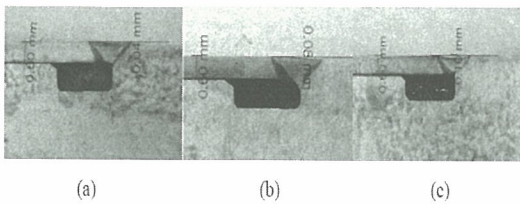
Macro-cross sections of laser welded specimens using type (a), (b), and ©.
